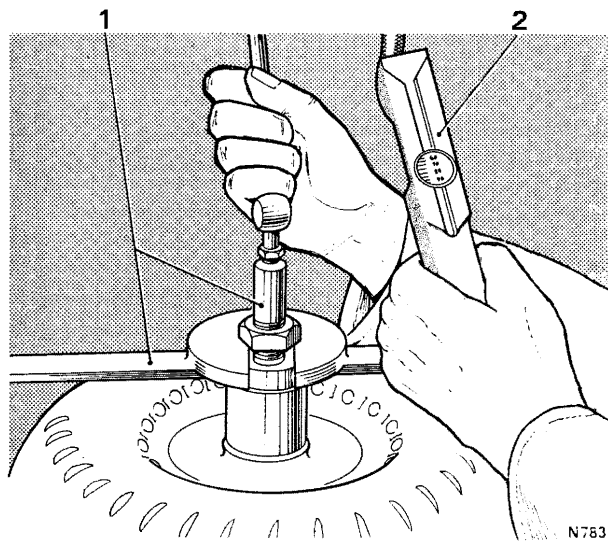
TORQUE CONVERTER—LEAK TESTING FIXTURE
